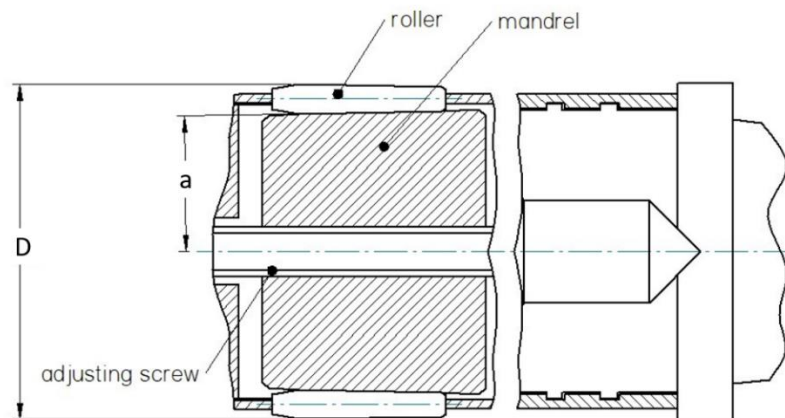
Hardening tool with depth adjustment of rollers via a screw.
